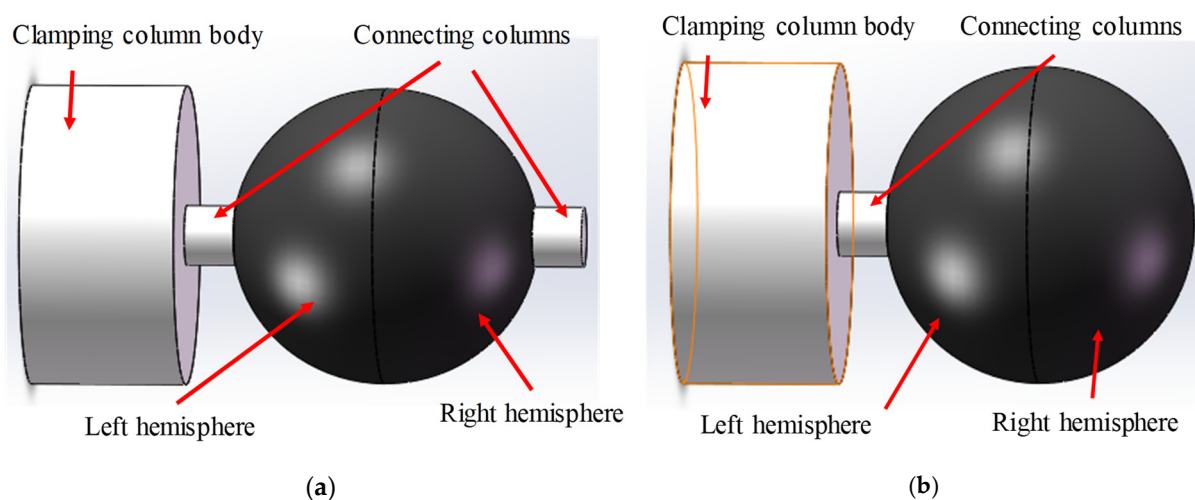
Schematic diagram of rotor ball shell machining and assembly: (a) hemisphere thread tightening; (b) sphere finishing.
